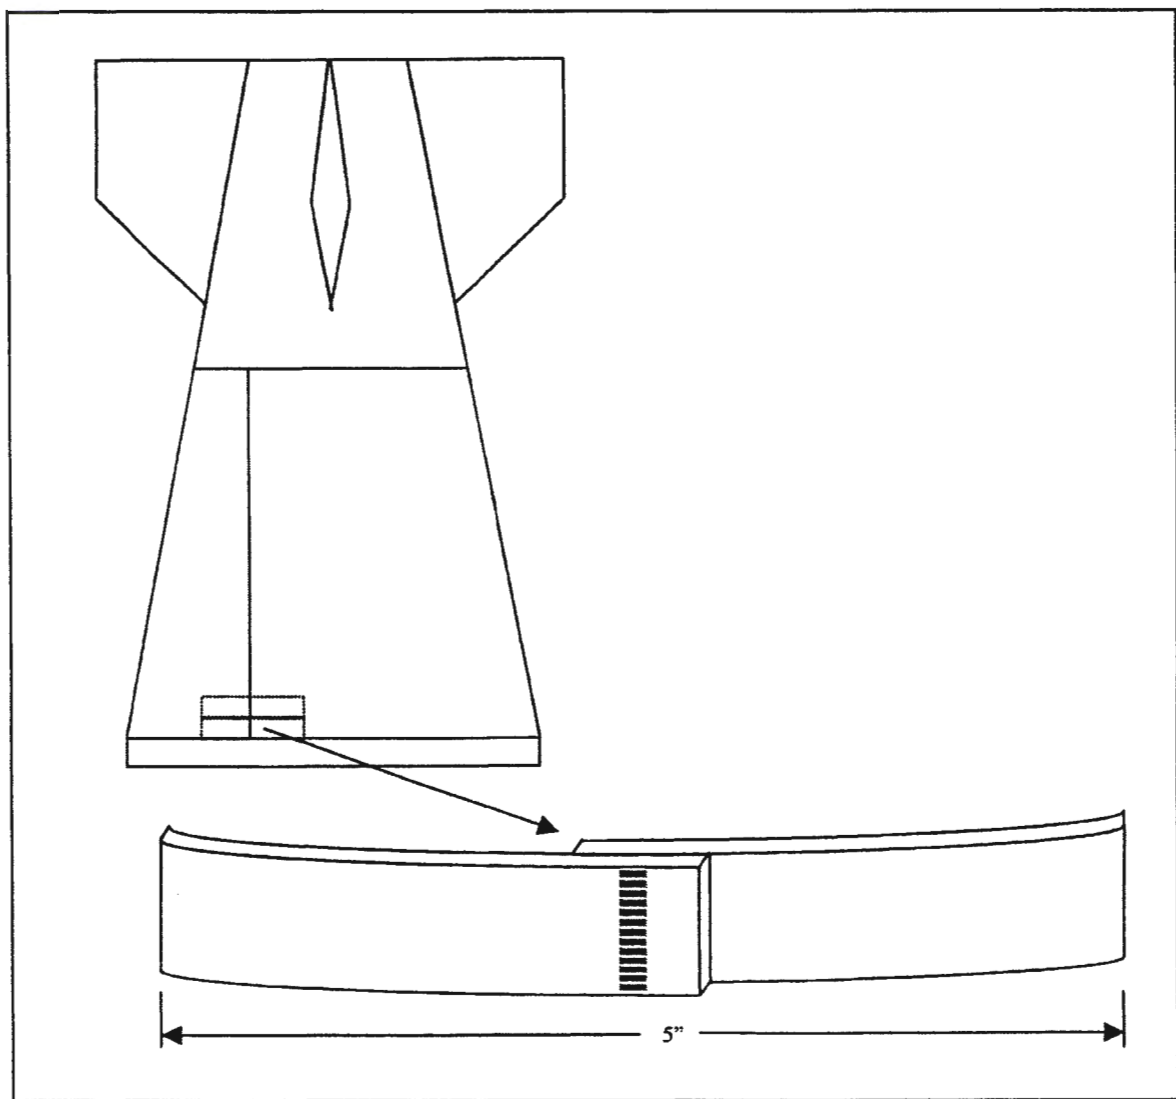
Method of sectioning for seam weld specimens.
